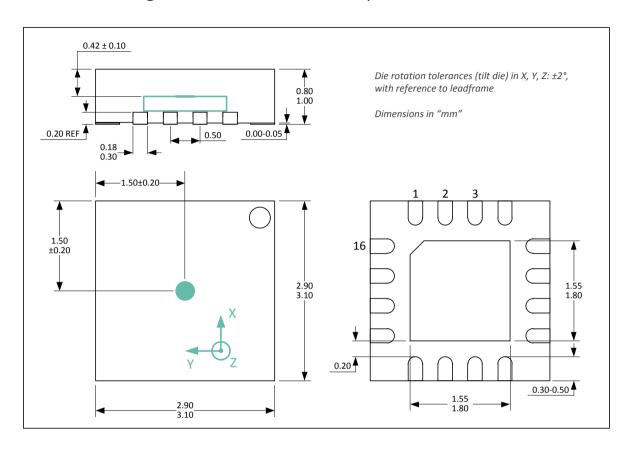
QFN-16 Package Dimensions and Sensitive Spot Location
